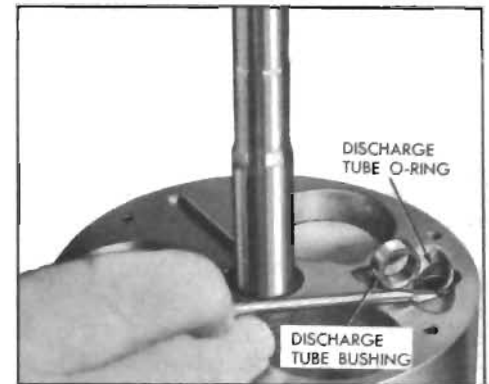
Installing Discharge Tube O-Ring and Bushing
